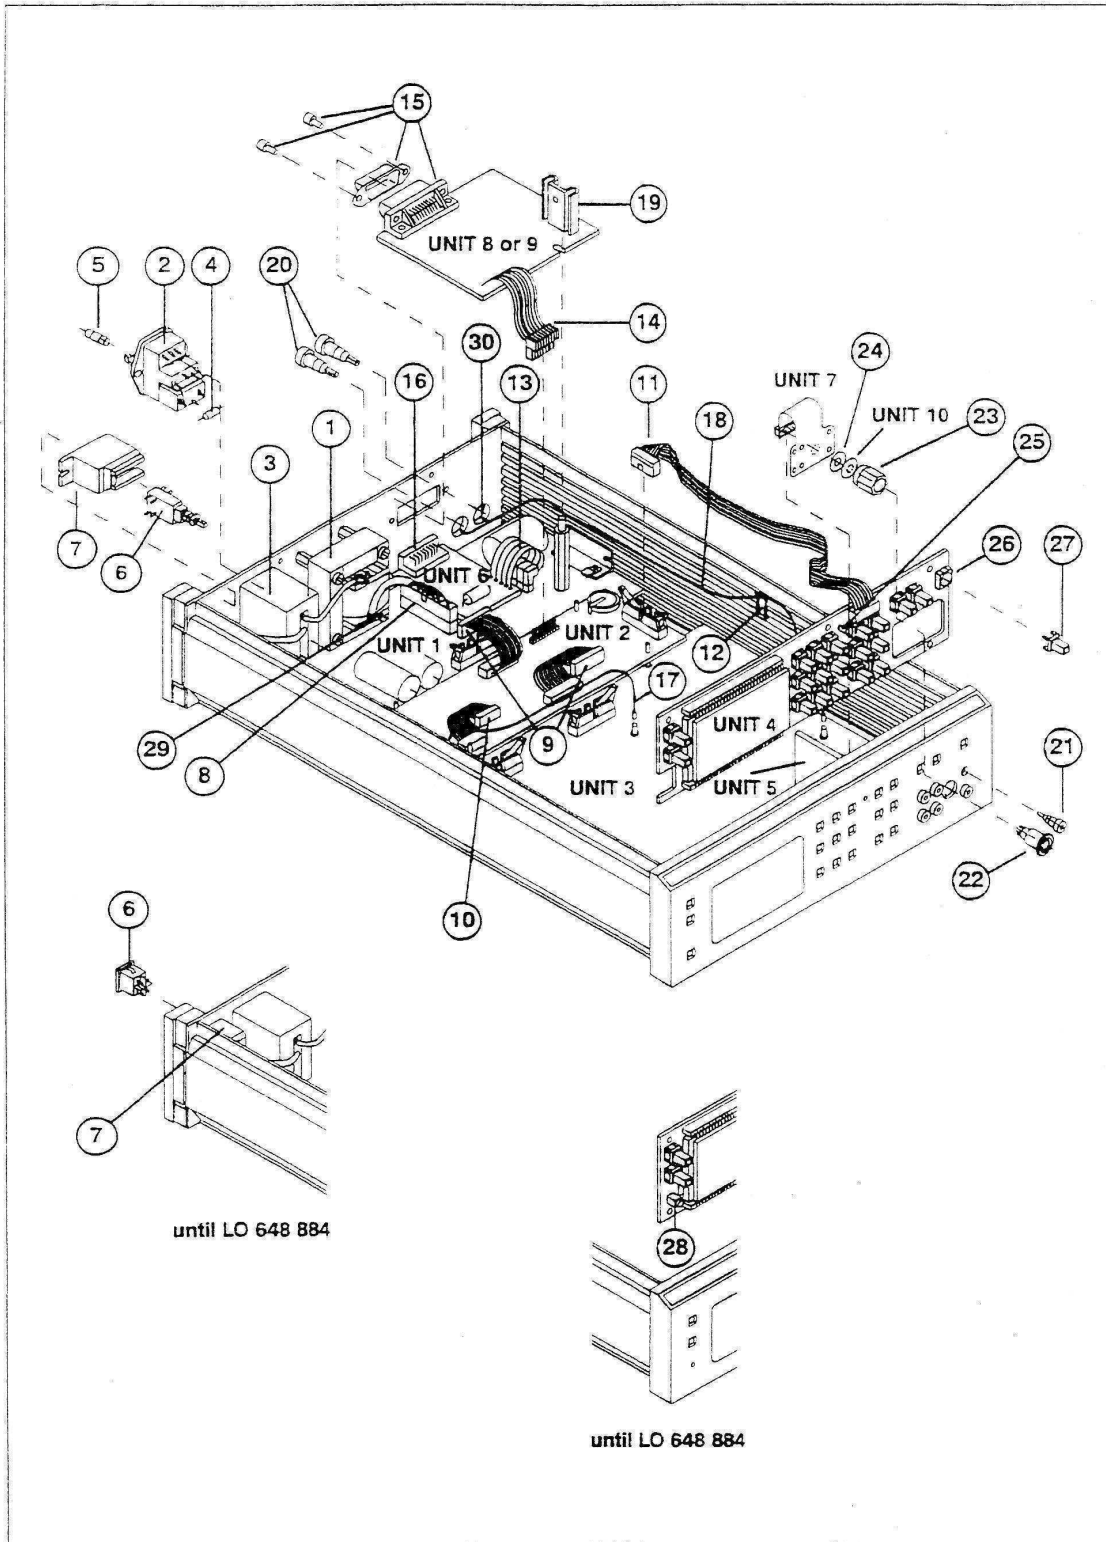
Mechanical parts on units, cables, miscellaneous
